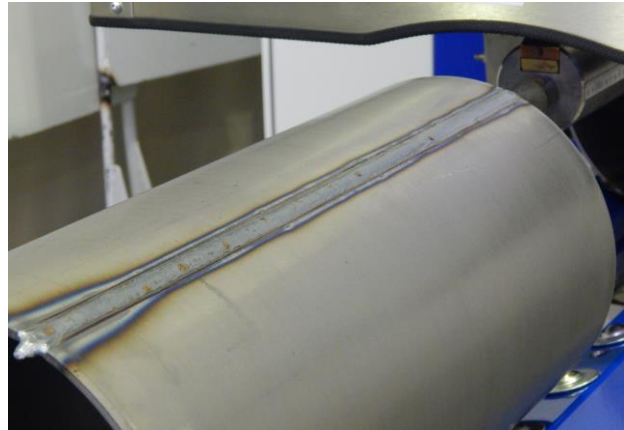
MAG welded Steel Tube $t = 5,0$ mm
